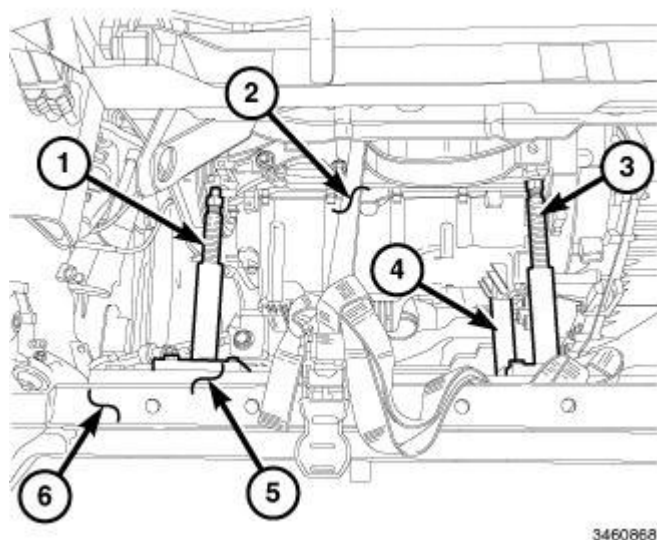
Engine Support Cradle, Cradle Posts, Safety Strap & Power Train Dolly
